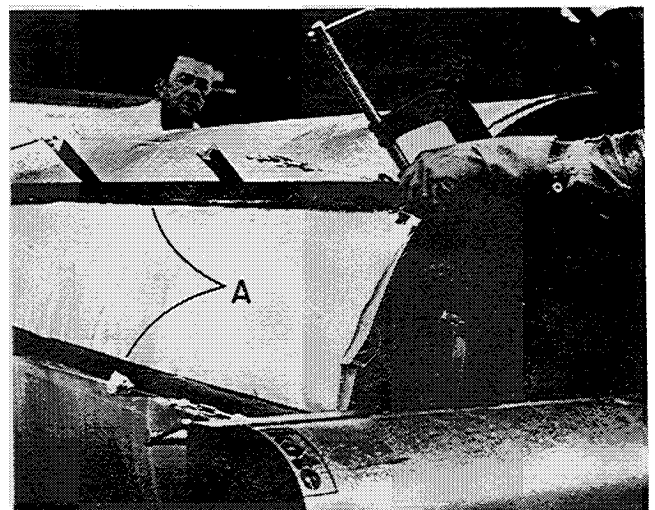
Layup of cylinder facing; A, clamps used in tension wrap.
